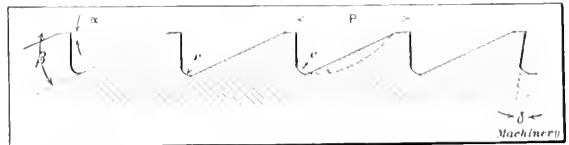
Diagram illustrating Pitch, Clearance Rake and Filletting
